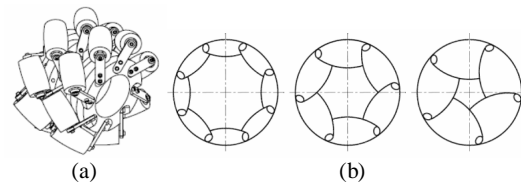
a) New constructive wheel design; b) Rollers number according to their size.
